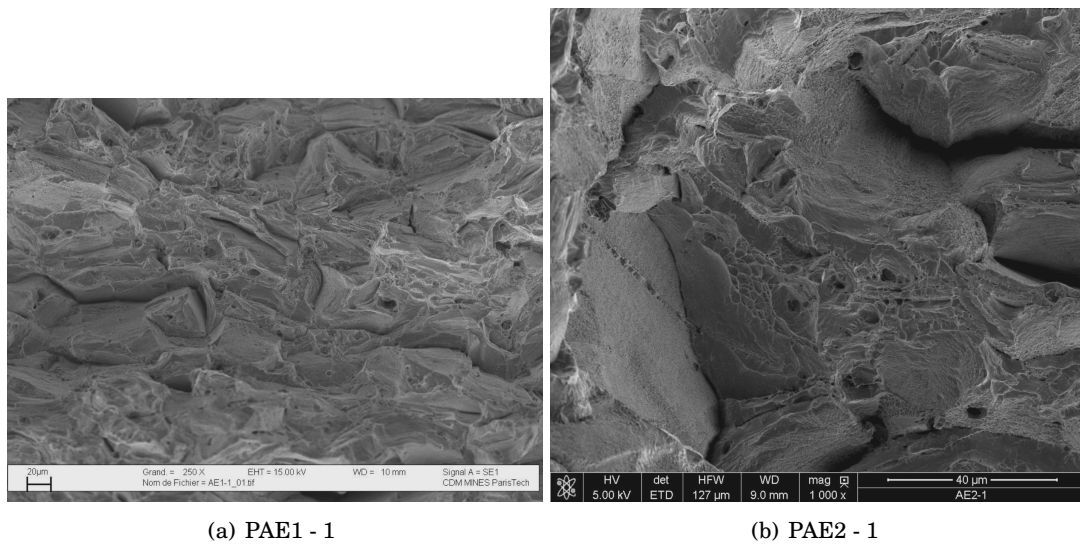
Fracture surfaces observations of the notched specimens PAE1-1 and PAE2-1. The fracture surfaces are characterized prevalently by intergranular fracture. Images were taken near the centre of the fracture surface.
